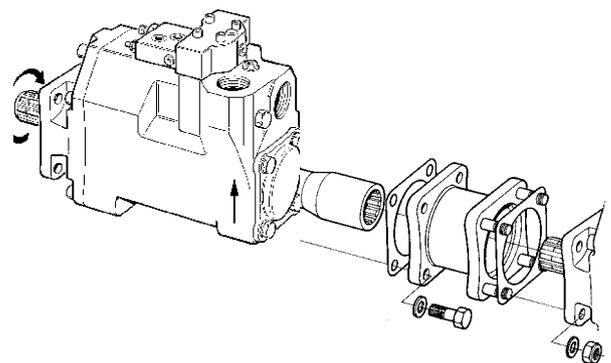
Adaptor kit (P/N 379 7795) for tandem coupling.
